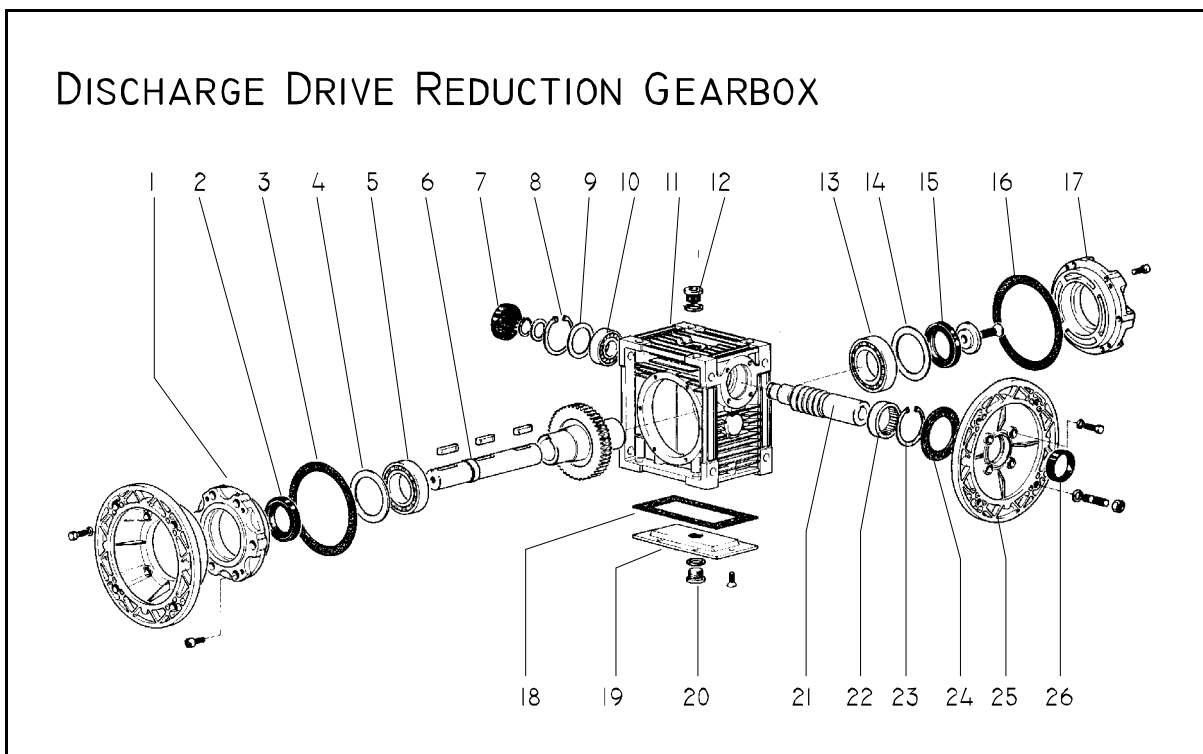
Discharge Reduction Gearbox (Exploded View)
